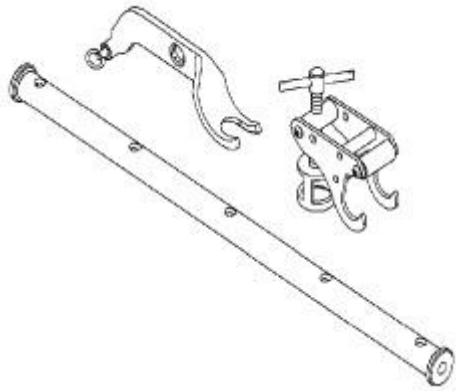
COMPRESSOR, VALVE SPRING - 9065A
